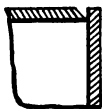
Method of welding on the cover of a rectangular sheet vessel.
